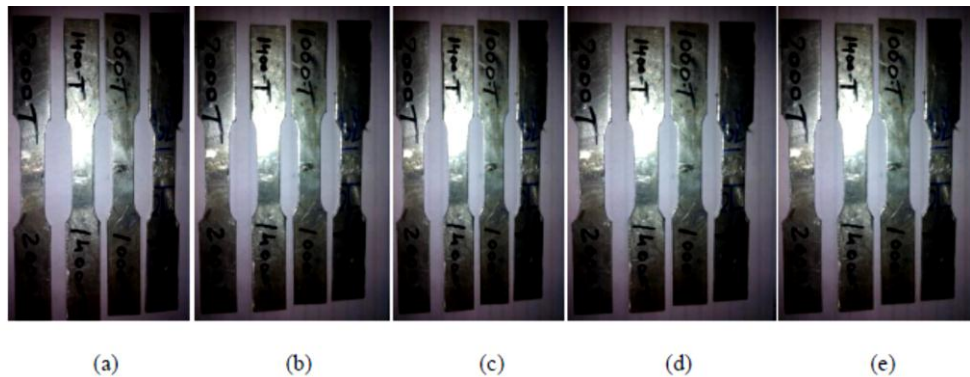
Tensile test specimens of Fsw welds (Di similar Al Alloys)at diiferenr rpms using (a) Cylindrical Tool (b) Conical Tool (c) Knurling Tool (d) Groove Tool (e) Cylindrical Thread Tool
